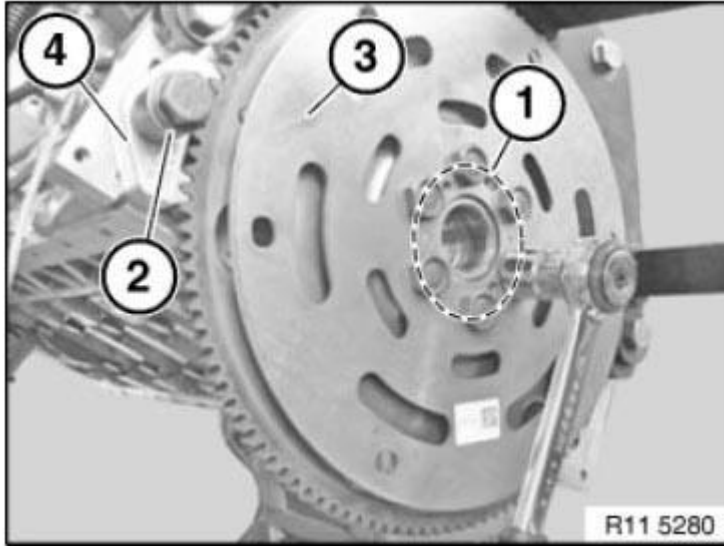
Identifying Flywheel With Bolts And Special Tool
